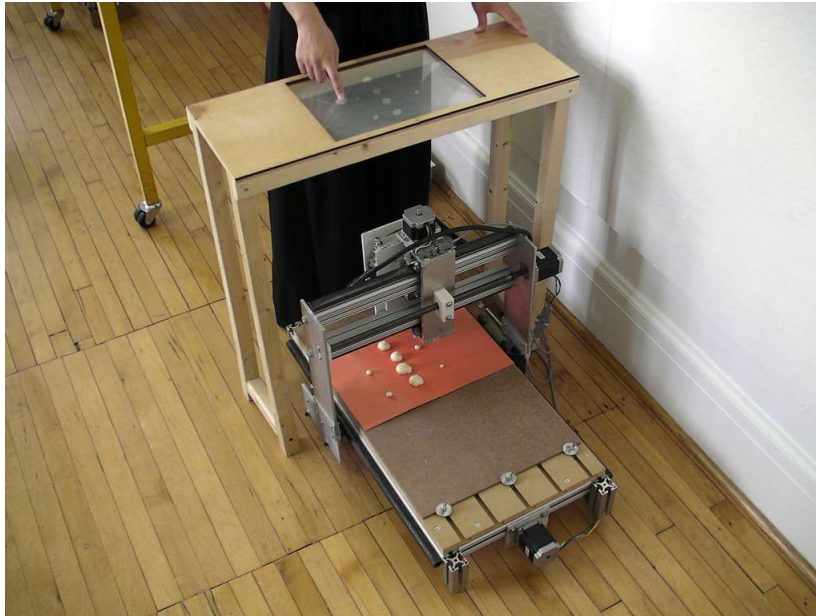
Shaper, a three-axis CNC machine that deposits expanding foam controlled by sketch-like gestures on a touch screen [4].
